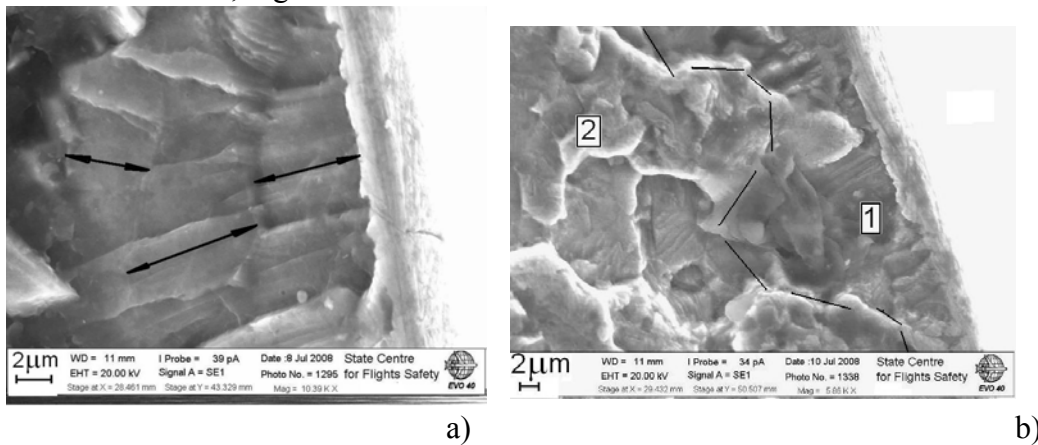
The fragment (a) of the disk fracture surface at the surface of the groove for blade with "streamlet-like" relief and meso-beach-marks, and (b) fracture area of transition from the "streamlet-like" relief "1" to faceted pattern (2). Arrows specify distances between MBMs.
